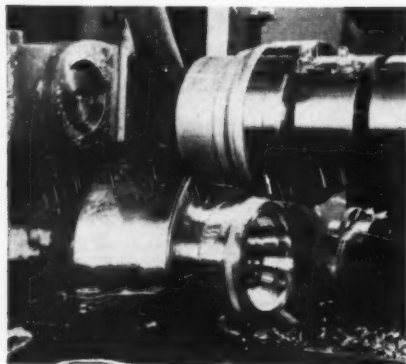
The bottom parts are the units which must be substituted for the four upper parts to change Cleveland model AB from a bar to a chucking machine.
